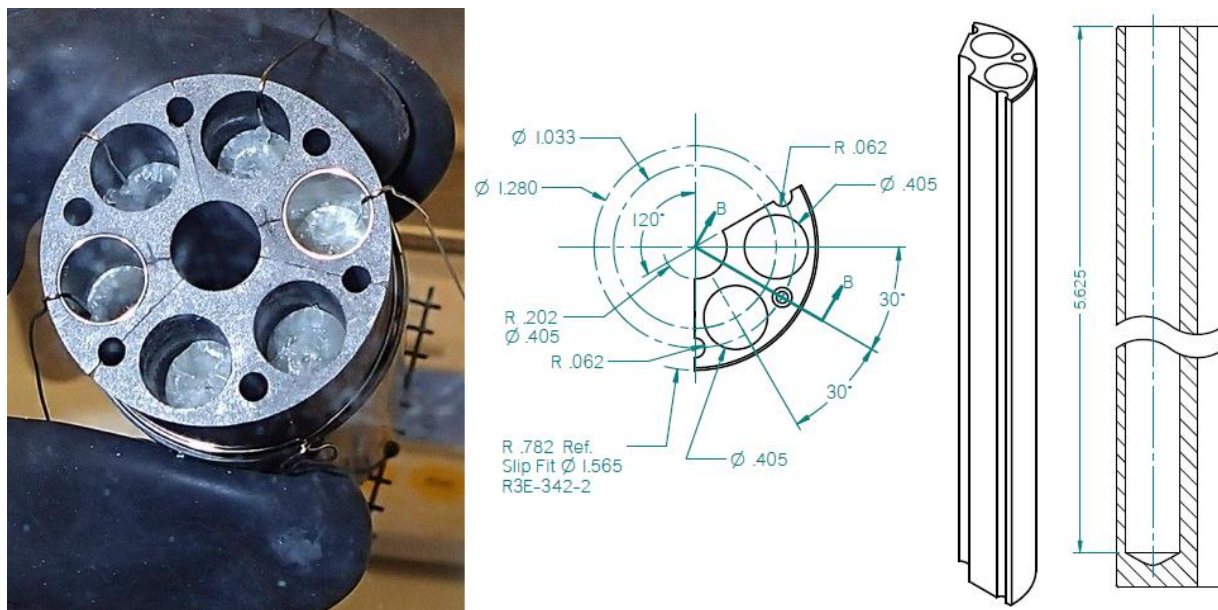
FS-1 crucible before irradiation (left). The crucible was assembled from three sections (right) fabricated according to the drawing with dimensions in inches.
